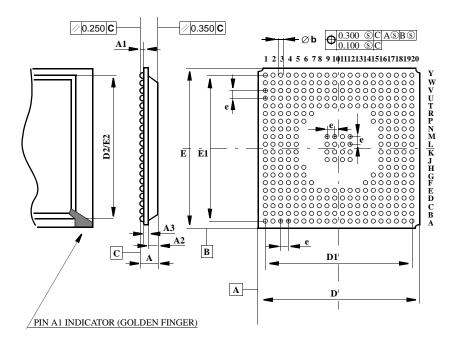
Physical Dimensions for 328-Pin BGA Package
